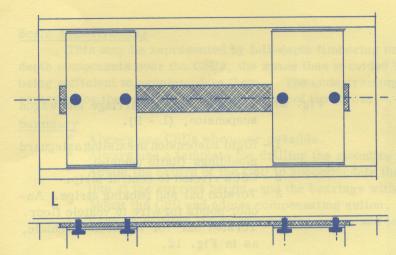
Four-wheeled vehicle mounting of CSUs using a solid packing and rivets.
